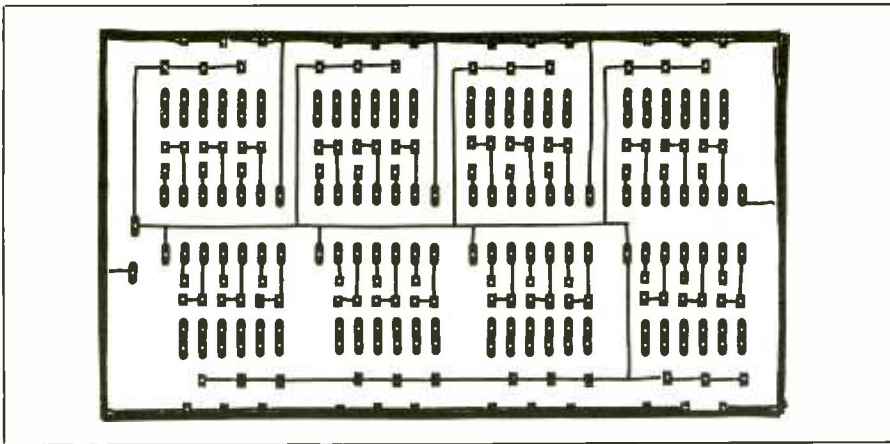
Actual-size etching-and-drilling guide for up to 24-channel tester. Two boards are needed for a 40-pin device tester.
